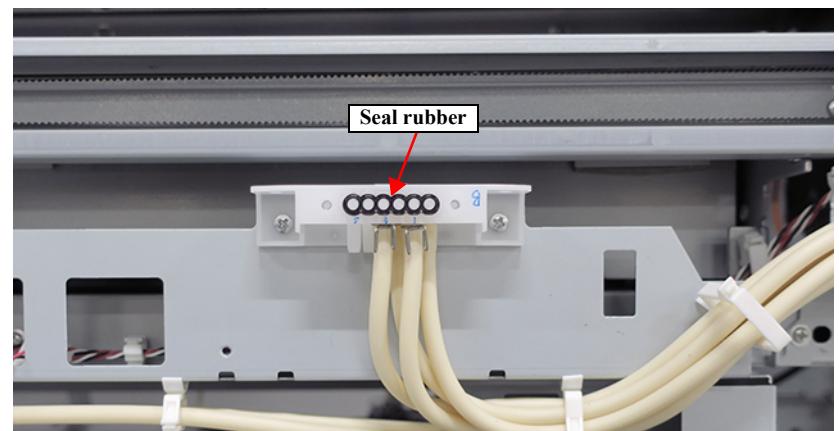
Removing the INK HOLDER RIGHT (4)
